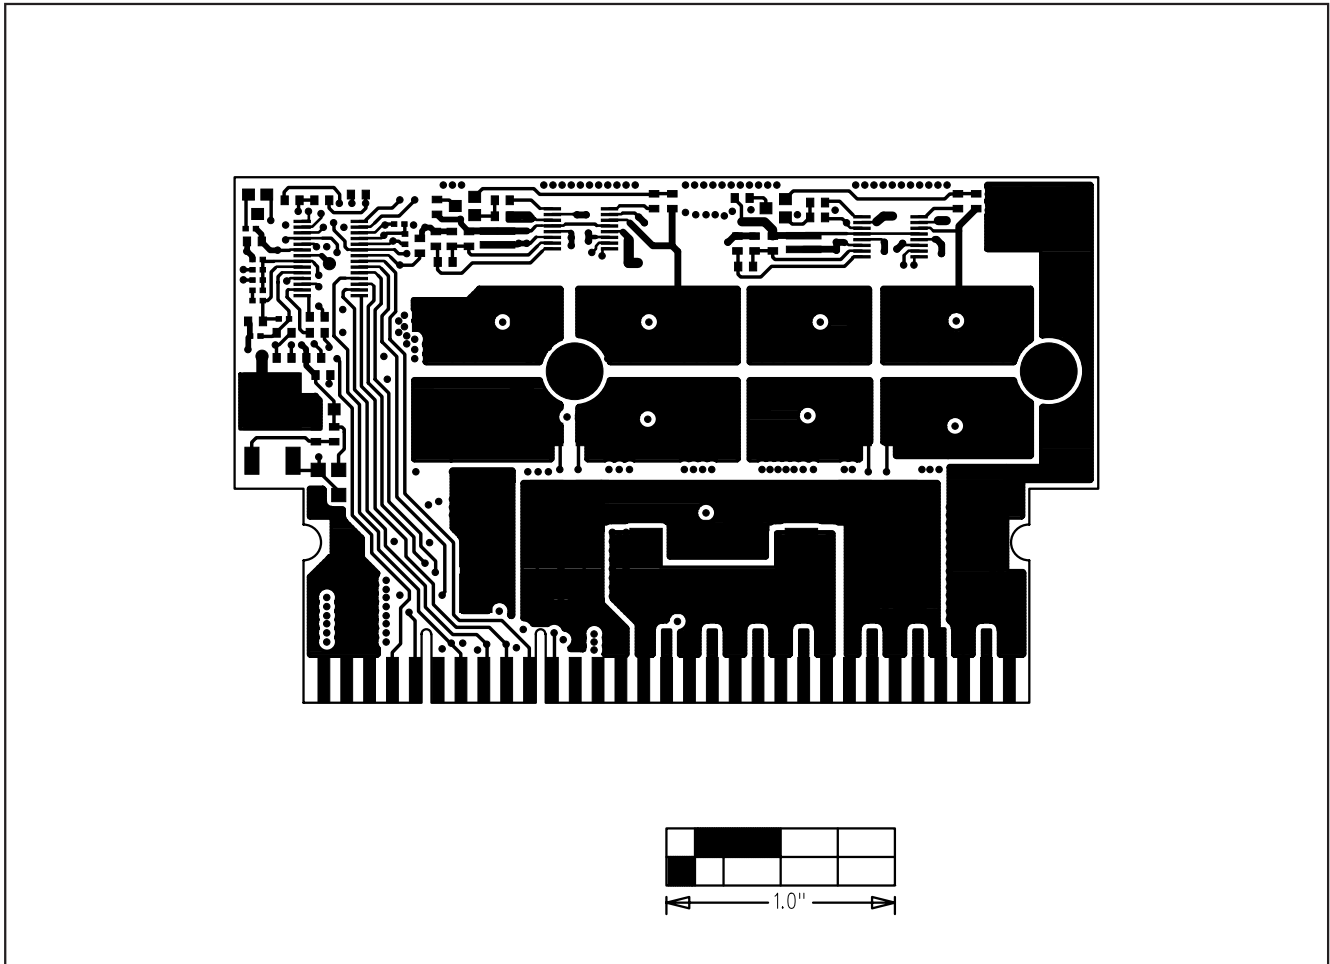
MAX8525 EV Kit PC Board Layout—Component Side
